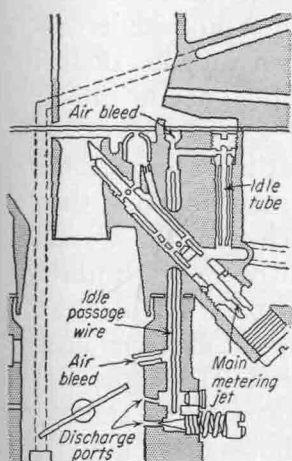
Idle-and-low-speed circuit in carburetor. (Studebaker-Packard Corporation)
